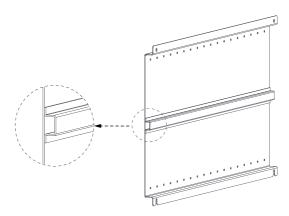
Welding a lateral reinforcing beam on the back of the backplate
